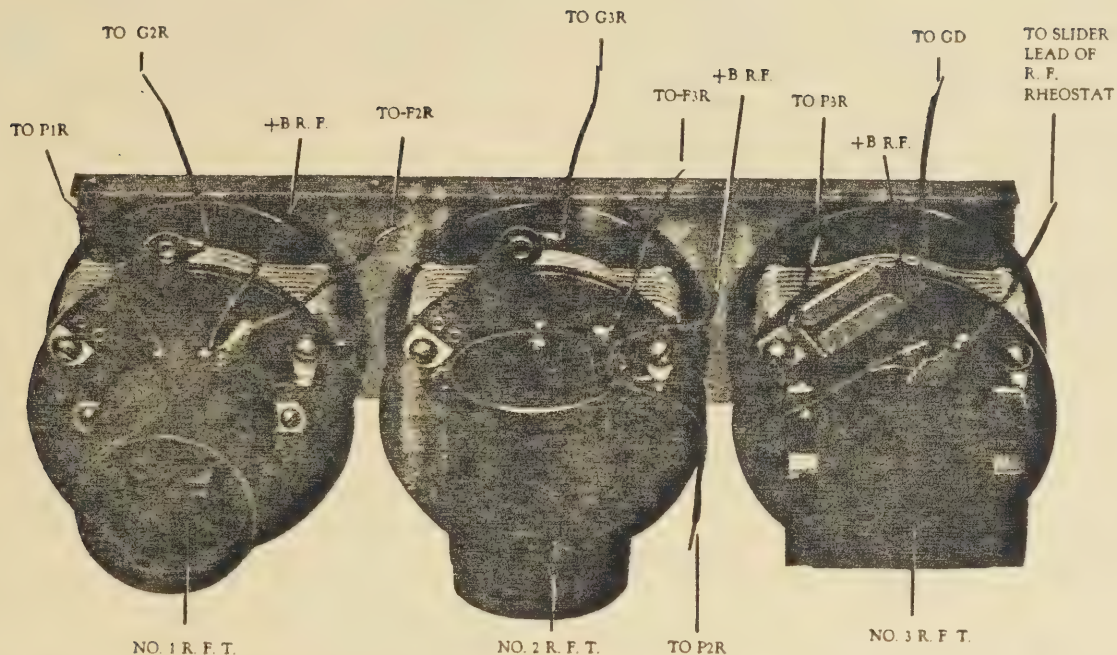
VIEW OF SUB-PANEL ASSEMBLY MODEL 30 (Early Type), SHOWING WHERE EACH LEAD IS TO BE CONNECTED.
